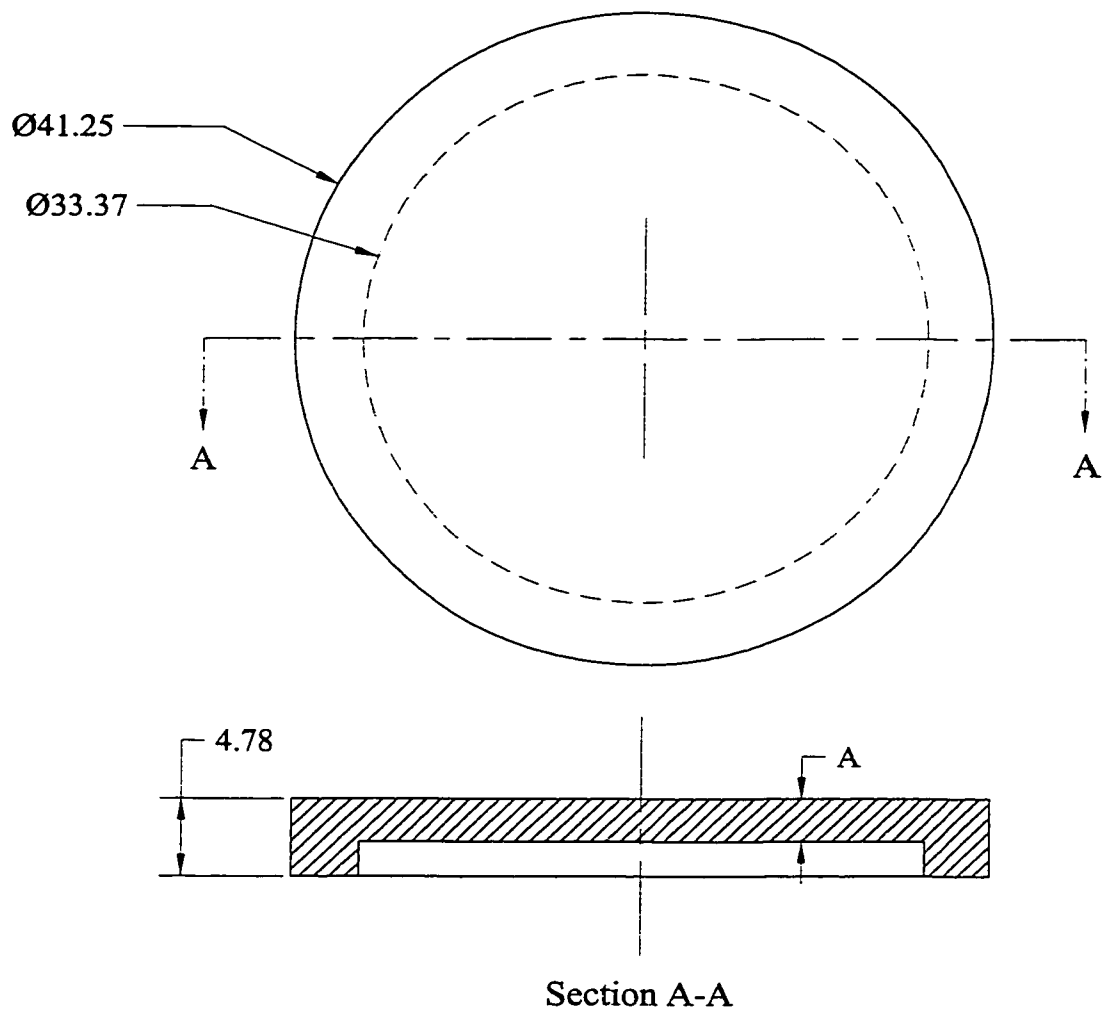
Machine Drawing of the *In Vitro* Testing Discs
